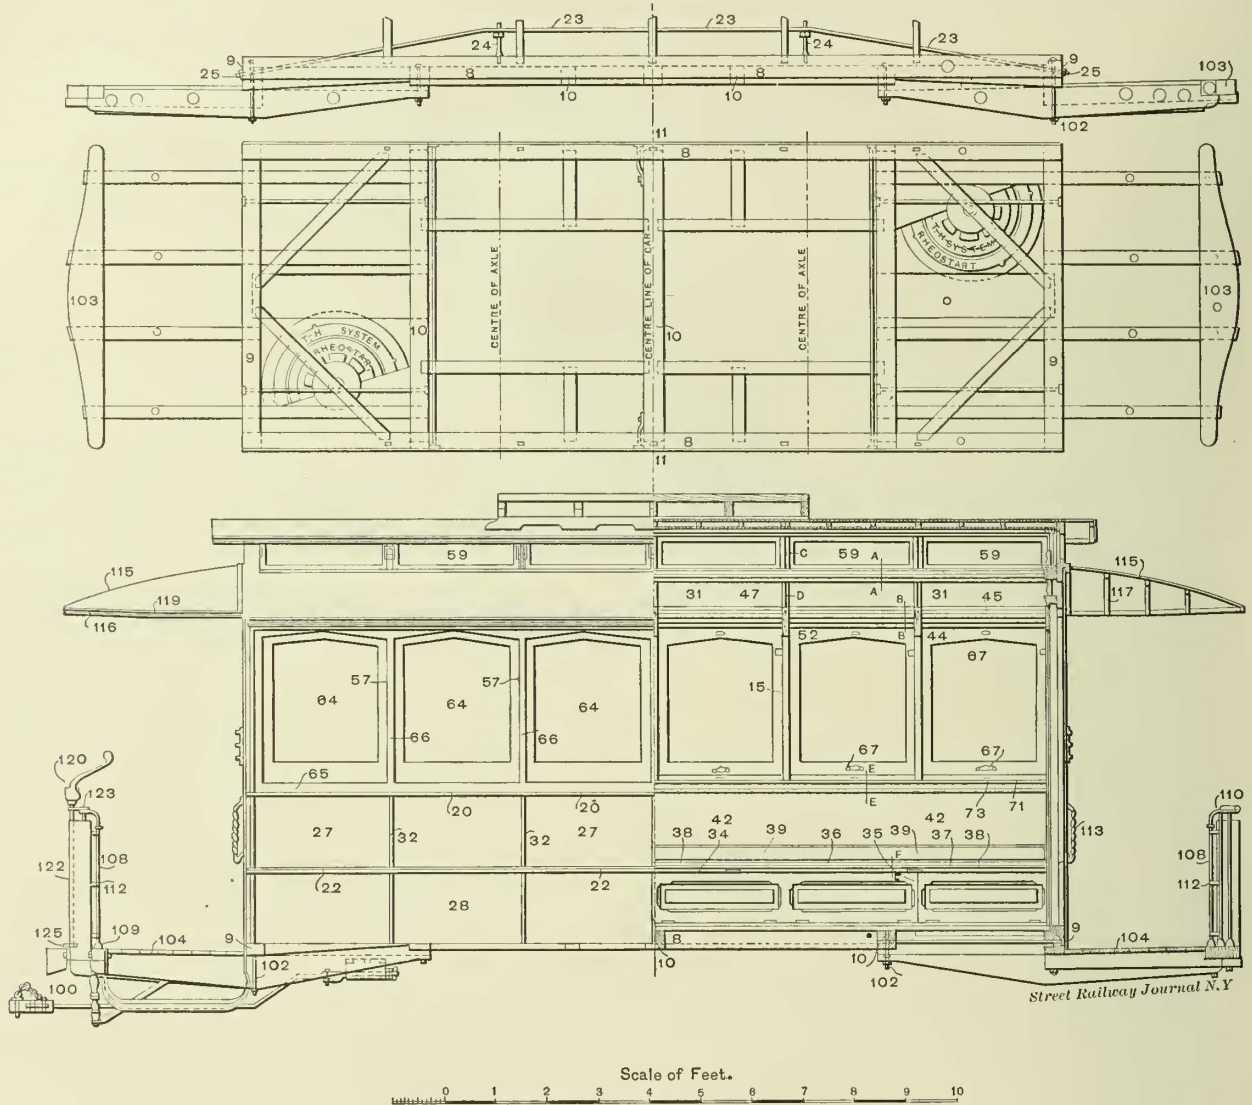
SET OF SHOP DRAWINGS FOR SIXTEEN FOOT ELECTRIC CAR—THE LEWIS & FOWLER MANUFACTURING CO.
